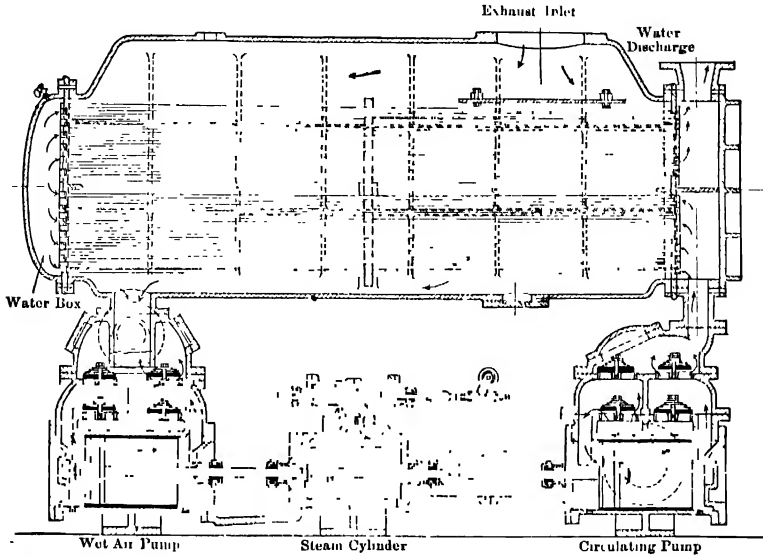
Wheeler-Admiralty Surface Condenser Equipment (Piston-type Auxiliary Pumps).
